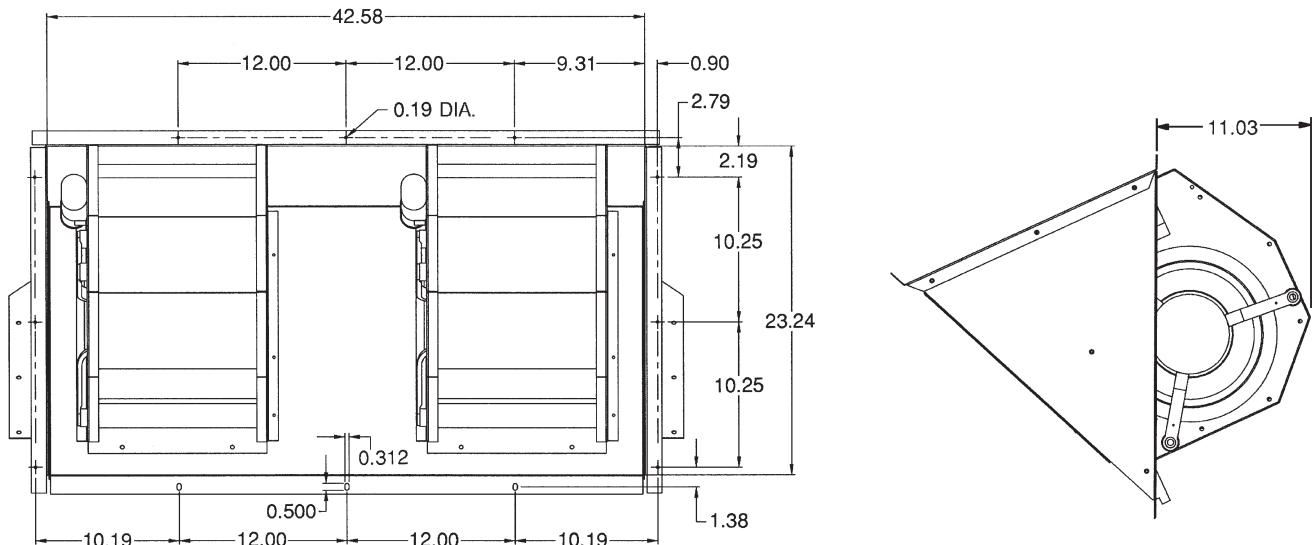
Side Return Air Conversion (for CRPWREXH033A00, 034A00, 035A00, and 036A00)
